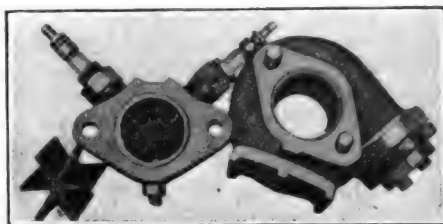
Parts of Good Double Blower Atomizer Spray of Starting Burner.
